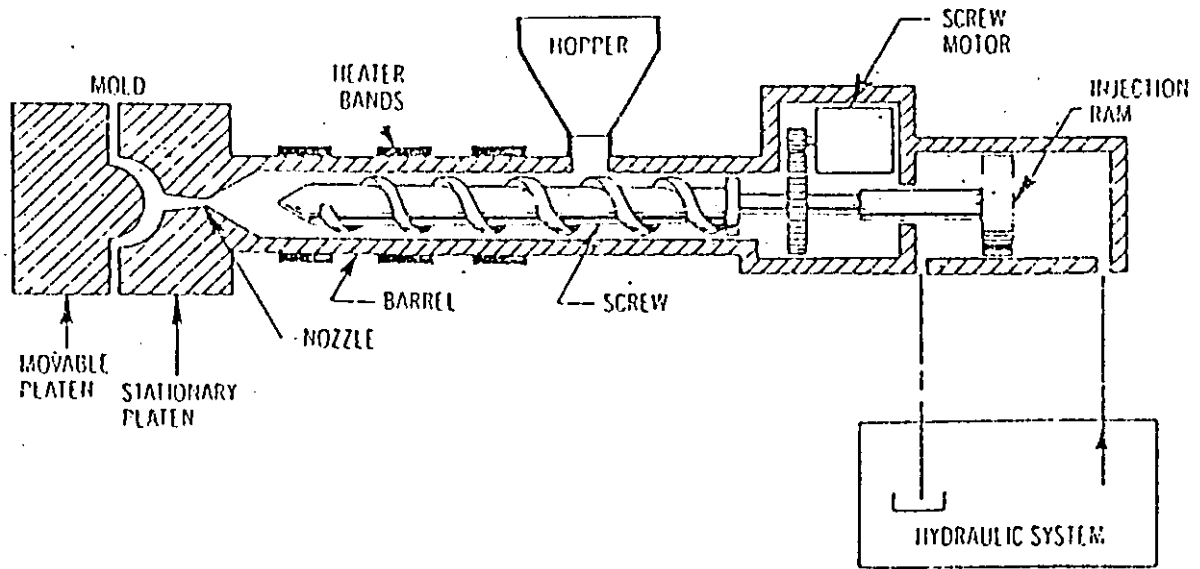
A Schematic Diagram of a Reciprocating Screw Injection Molding Machine.
